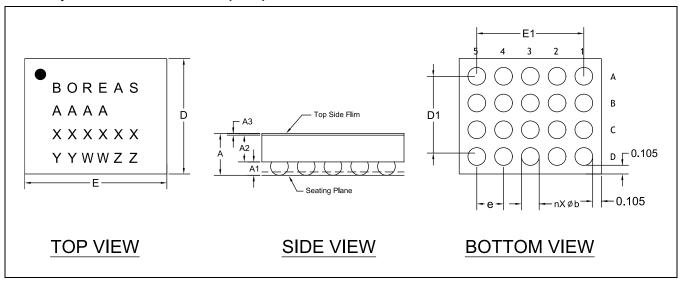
WLCSP 20B 2.1mm × 1.7mm package outline drawing with top, side, and bottom view
